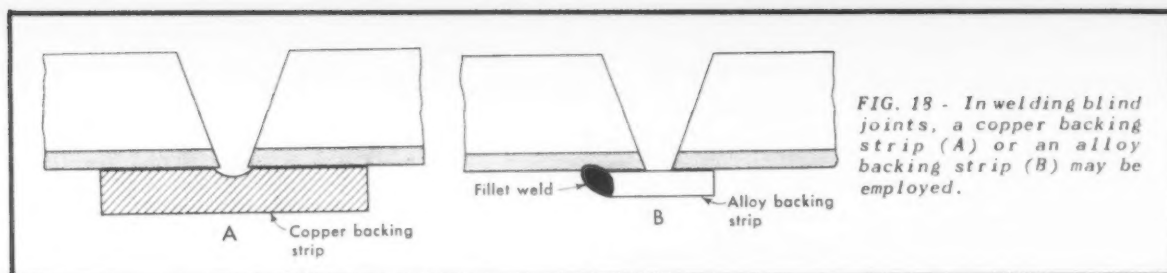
In welding blind joints, a copper backing strip (A) or an alloy backing strip (B) may be employed.
